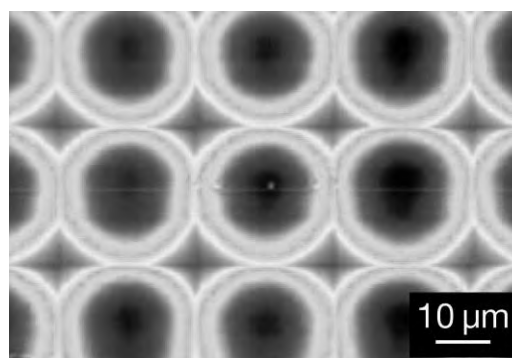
Lens array pattern fabricated by ultra-precision machining.
